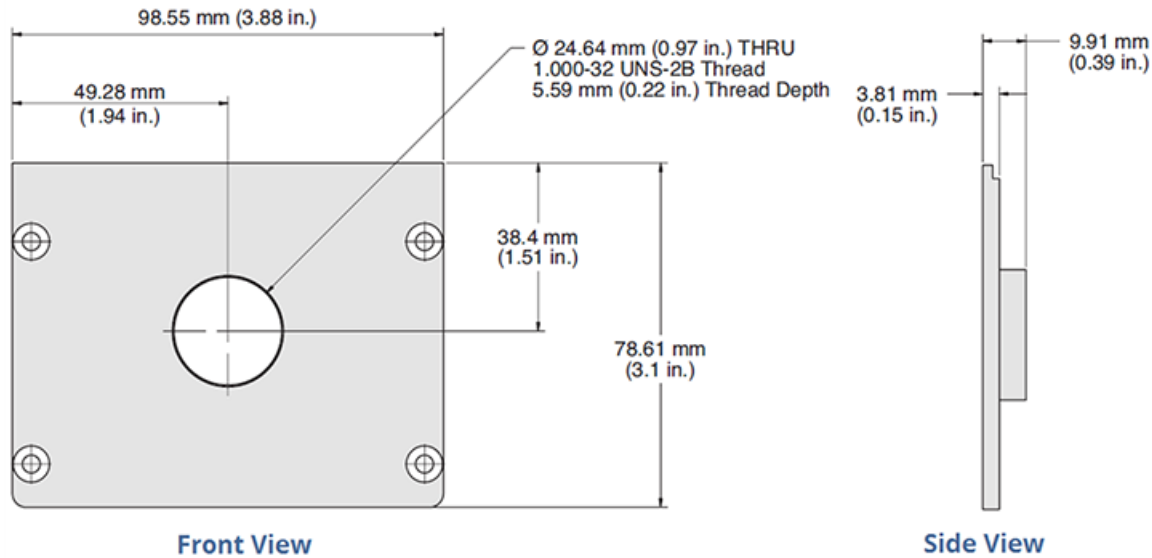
Dimensions – Optional C-Mount Front Plate
